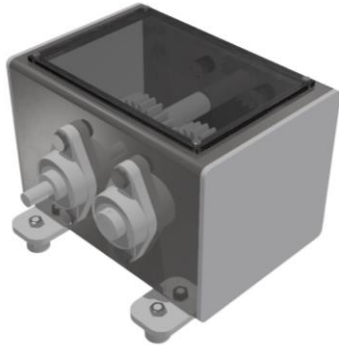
3D model of the dedicated gearbox module with a gear ratio of 1.04 – side view
